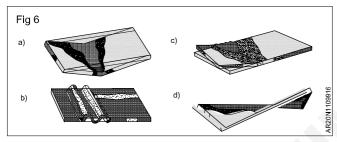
unibody collision damage: (A) bending, (B) crushing or collapsing, (C) Widening, and (D) twisting
